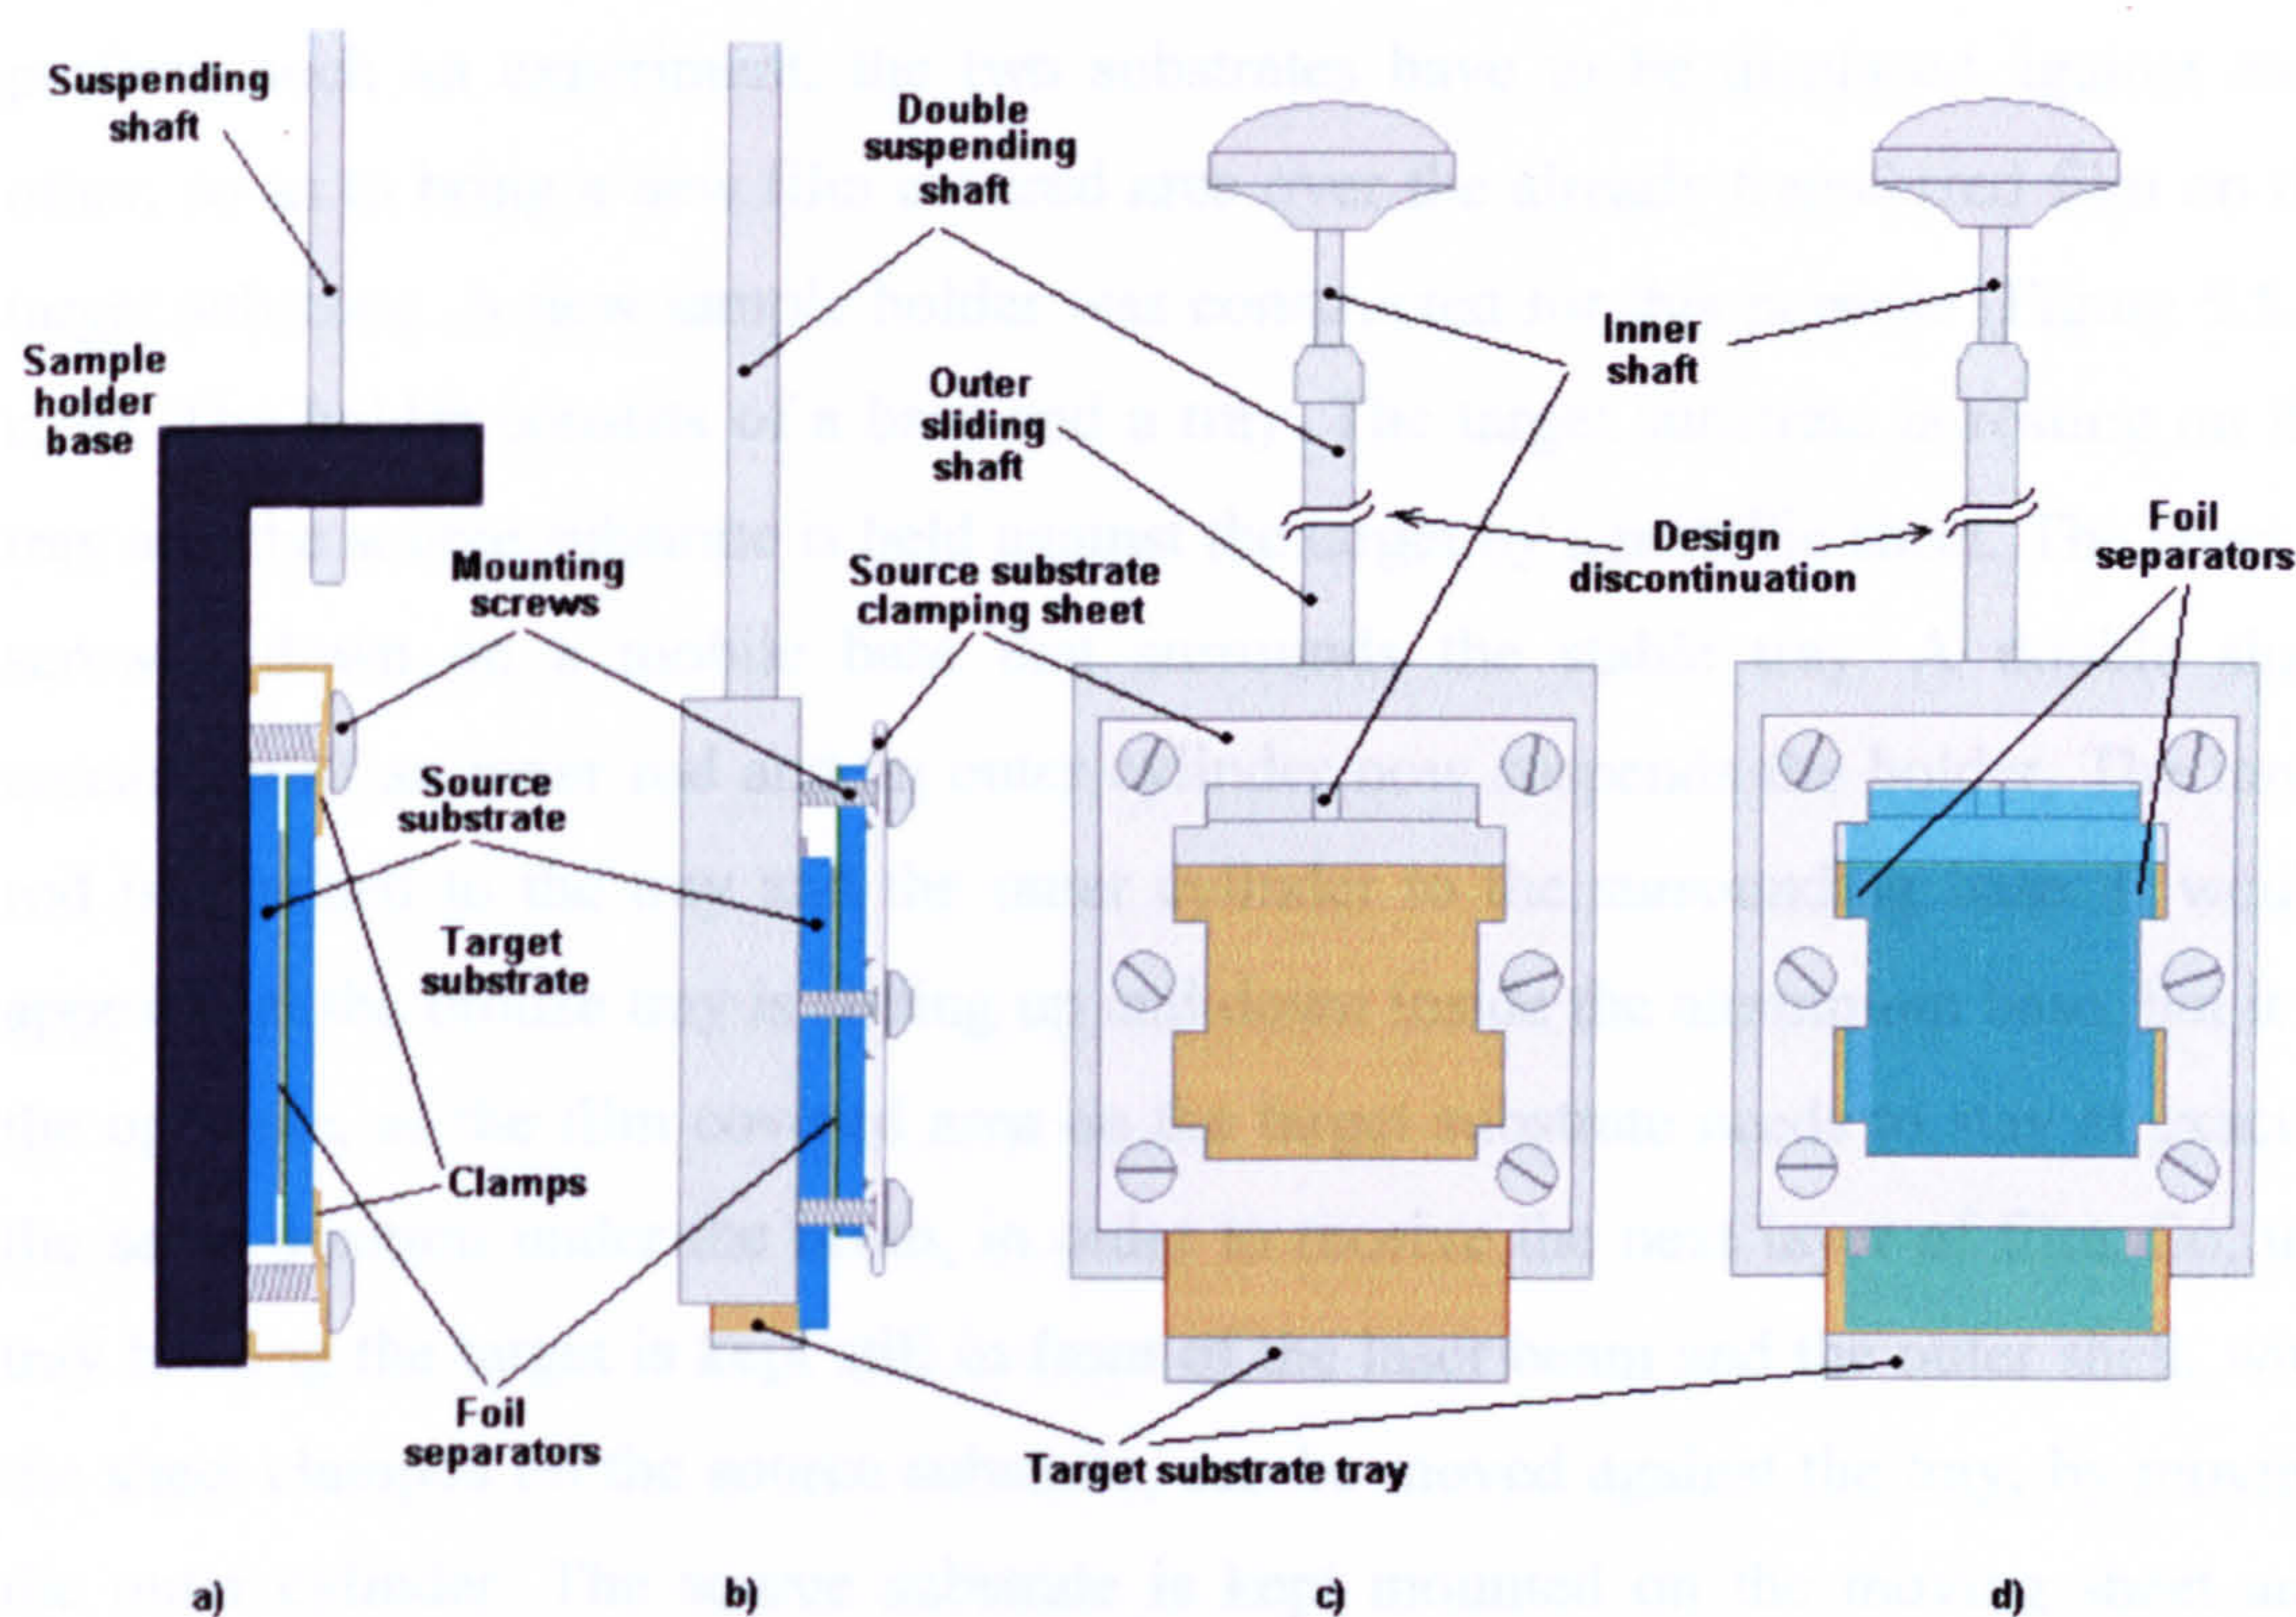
Schematic of sample holders. a) Side view of simple holder for single layer transfers, b) side view of multiple layer transferring holder with sliding tray, c) Front view of holder for multiple layer transfers without the mounted samples and d) with the mounted substrates and the spacers at an offset to each other.
